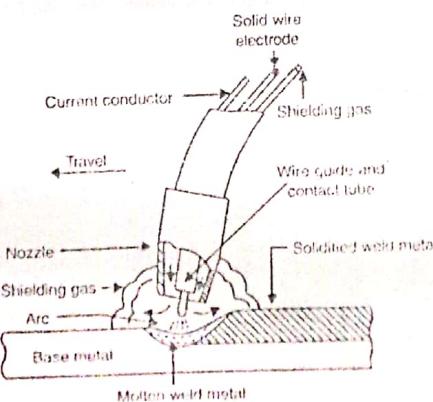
(a). Principle of Metal Inert Gas Welding (MIG).
